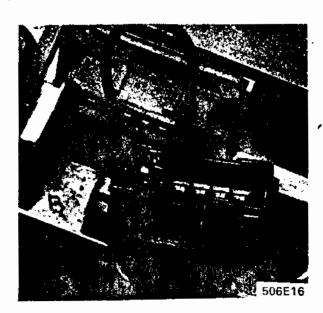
E-16 Jumper Wire Installed on Air Flow Meter Connector Plug
